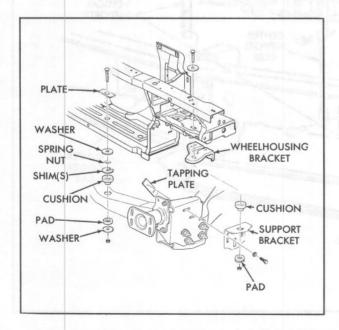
Radiator Cradle Mounts—Except Eldorado
